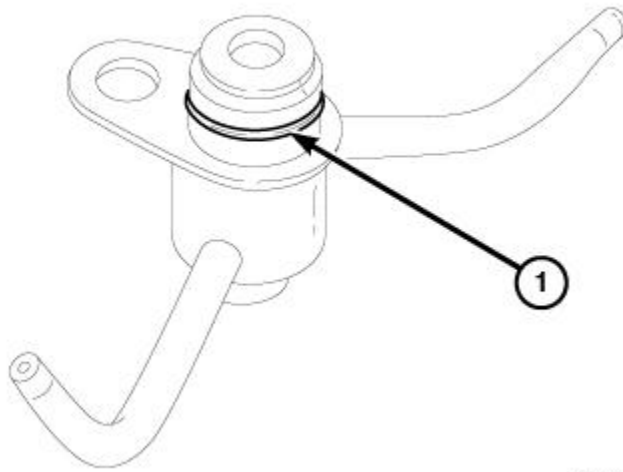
Piston Oil Cooler Jet O-Ring Seal
